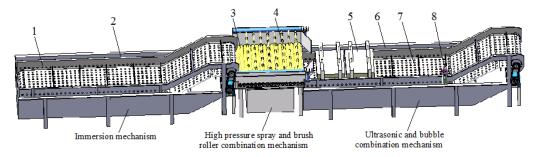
Constructional features and operating principle of wet cleaning equipment. 1. Conveying net chain of immersion mechanism; 2. Immersion tank; 3. Short filament brush roller; 4. High pressure spray assembly; 5. Ultrasonic vibration plate; 6. Cleaning tank; 7. Conveying net chain of ultrasonic and bubble combination mechanism; 8. Bubble spray tube assembly.
